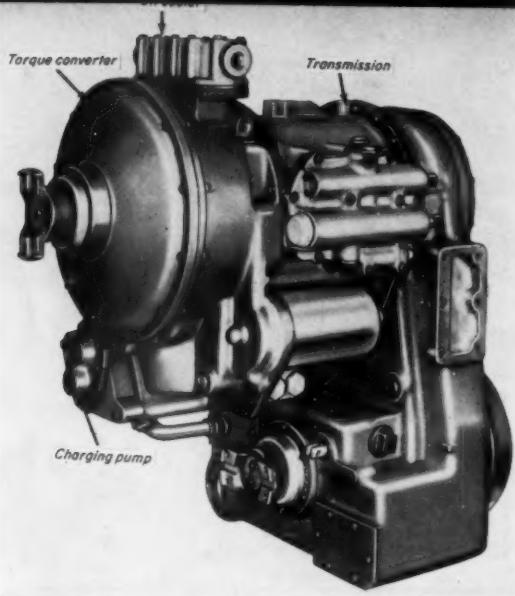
Torque converter unit for amidship mounting on a vehicle has integral sump, and charging pump. Stub shafts are connected to engine and transmission.
